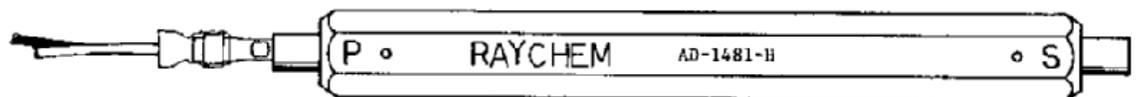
Contact Inserted into AD-1481-H Repair Holding Fixture
